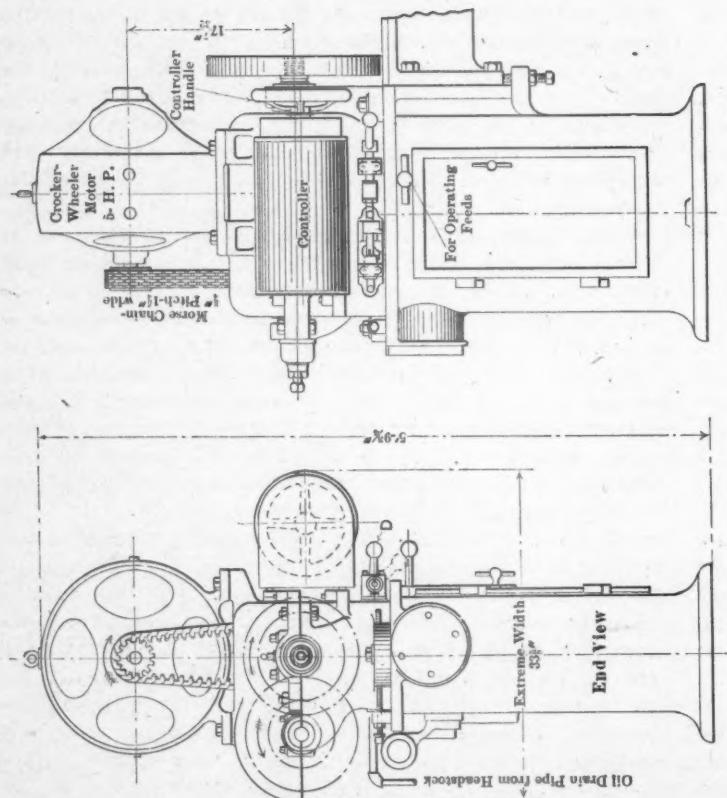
MOTOR DRIVEN TURRET LATHE.—AMERICAN TOOL &amp; MACHINE COMPANY.
